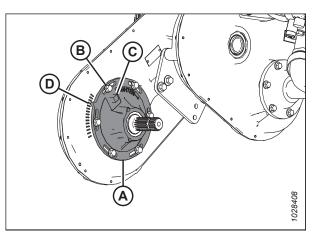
Completion Gearbox Chain Tensioner Cover
